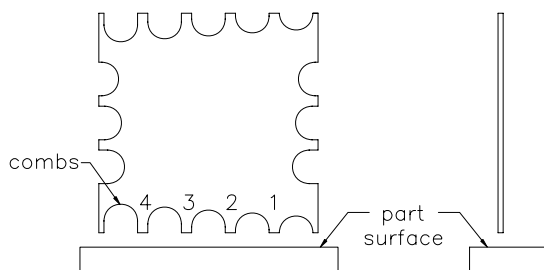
Place Wet Film Gauge Perpendicular to Part Surface
